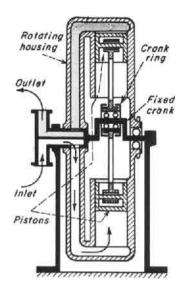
The housing of the Hele-Shaw-Beachum pump rotates the round-cranked shaft. Connecting rods attached to the crank ring cause the pistons to oscillate as the housing rotates. No valves are necessary because the fixed hollow shaft, divided by a wall, has suction and compression sides that are always in correct register with the inlet and outlet ports.
